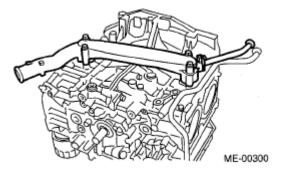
Identifying Water Pipe Assembly Courtesy of SUBARU OF AMERICA, INC.
